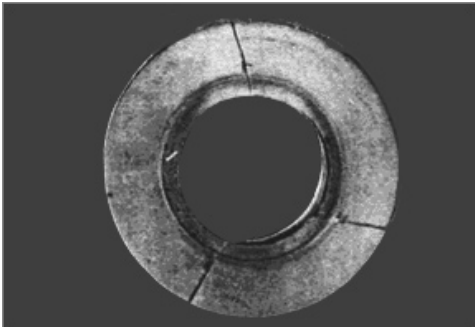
Photo of the welded joint with transverse cracks in the ceramics
